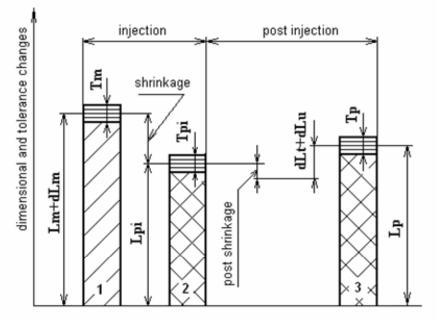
Resultant dimensions and tolerance of injection moulded piece. 1- L_m - dimensions of cold mould at 20°C ; dL_m –thermal and elastic expansion of mould ; 2- L_{pi} - dimensions of moulded piece after ejection from mould ; dL_t+dL_u - dimension increase with exploitation temperature and absorption of water; 3- L_p - exploitation dimension, T_m - mould tolerance, T_{pi} - injection moulded piece tolerance after 24 h, T_p - injection moulded piece tolerance in exploatation,
